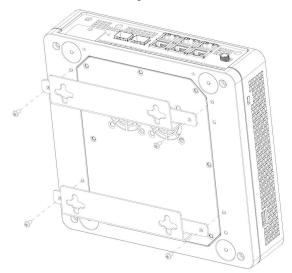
VEP1405 series wall mount installation - cross-shaped cutout
